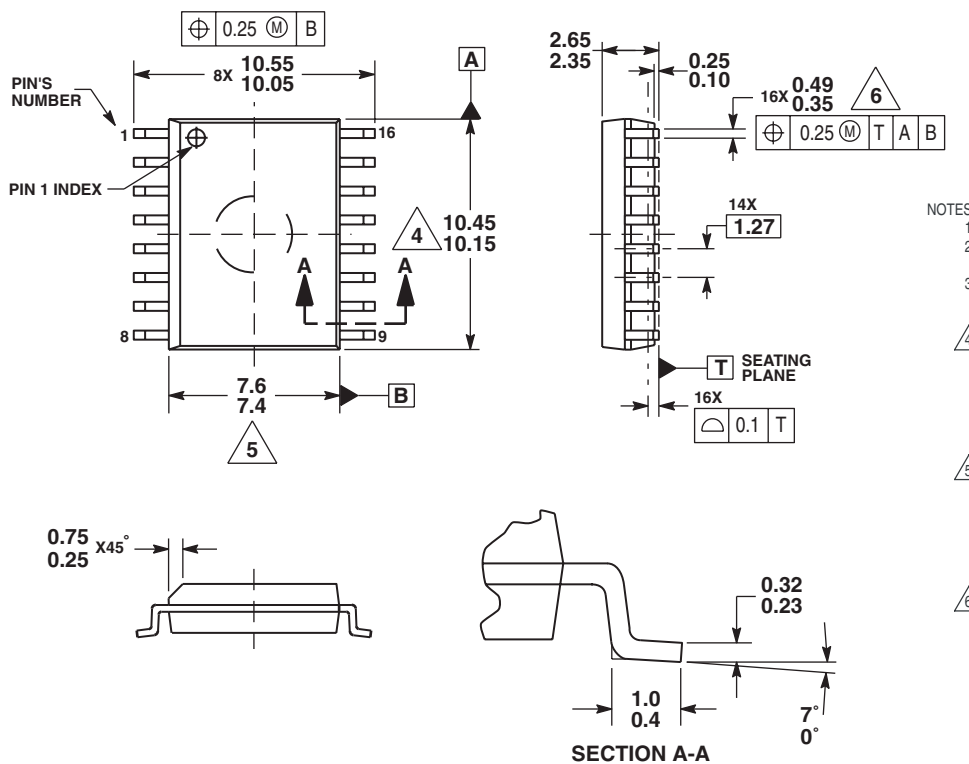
Outline Dimensions for DW SUFFIX, SOG
